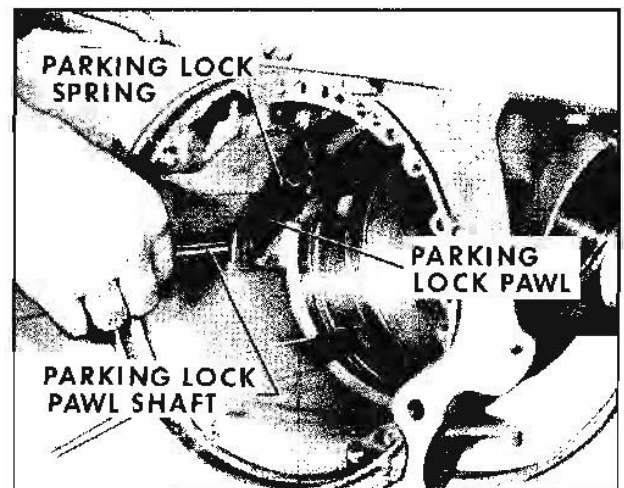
B-68 Removing Parking Lock Pawl Shaft
